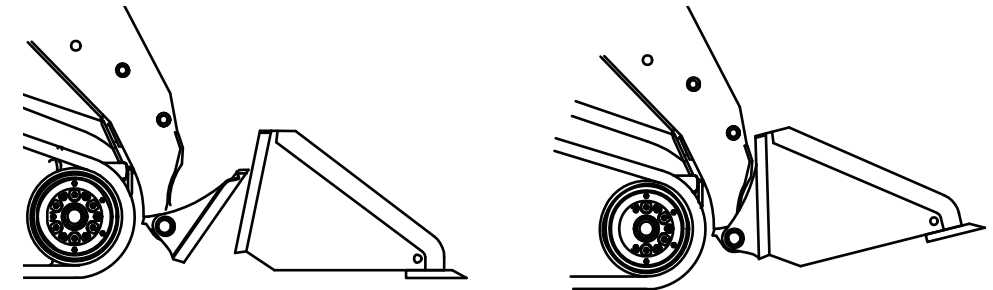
A QUICK ATTACH MECHANISM LOCKED TO ATTACHMENT
